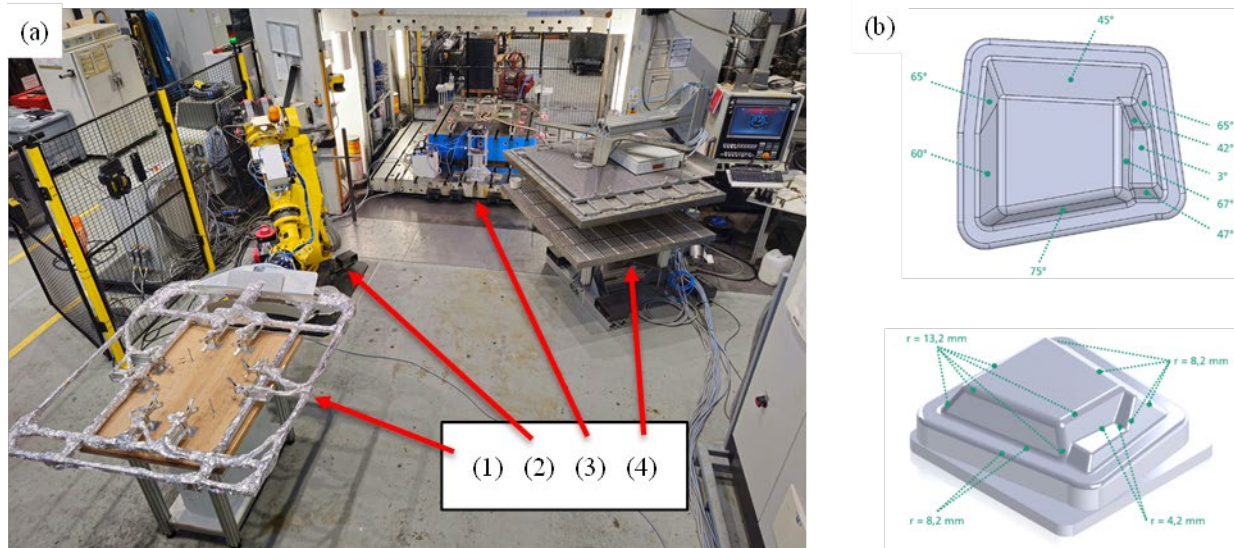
(a) industry scale process with (1) the gripper frame at the loading station, (2) an industry robot for transfer (3) a hydraulic press with the tool mounted and (4) a c-shaped infrared heating field; (b) complex shaped tool stamp with different forming radii and forming angles
